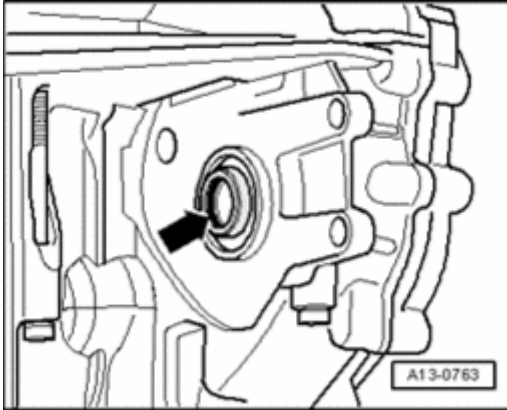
Checking Whether O-Ring Is Inserted In Power Steering Pump Input Shaft
